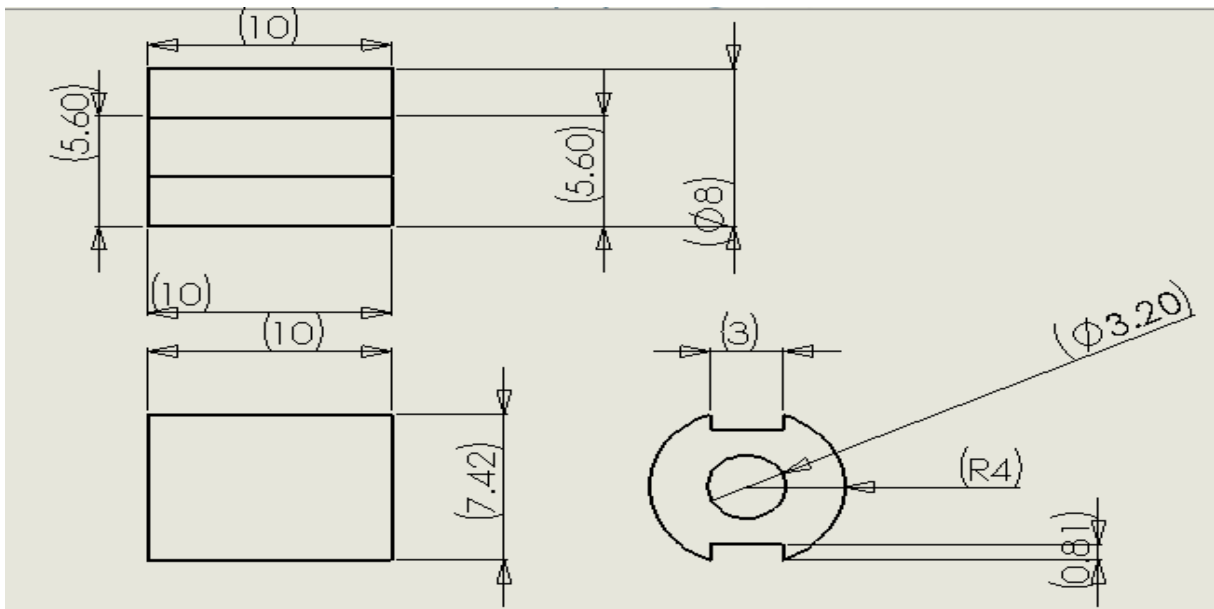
2-D schematic of brass piece to hold the PCB stick
